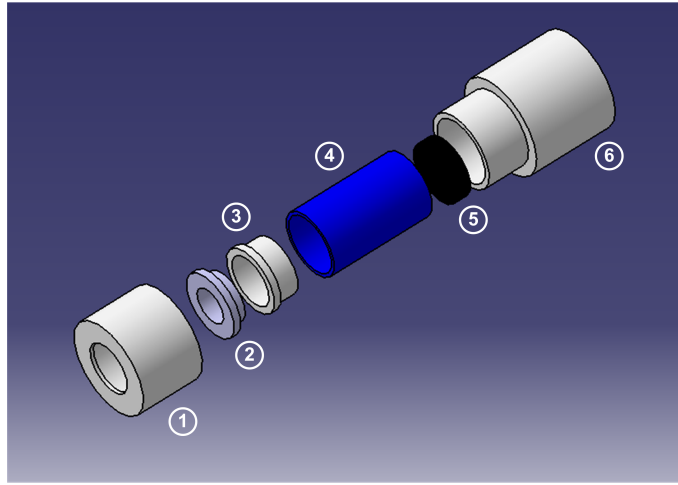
Exploded view drawing of the FC showing the main elements (see text for details).
